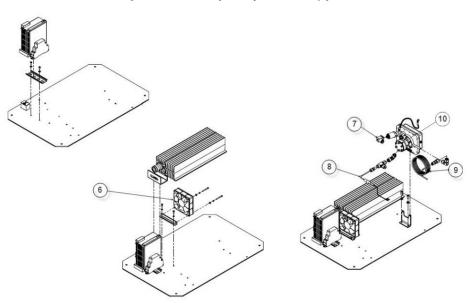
0.1 m sample cell panel assembly parts (continued)
